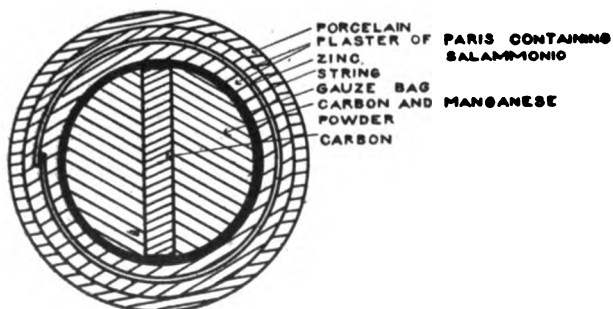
Horizontal cross section of Dr. Lessing's dry cell.
